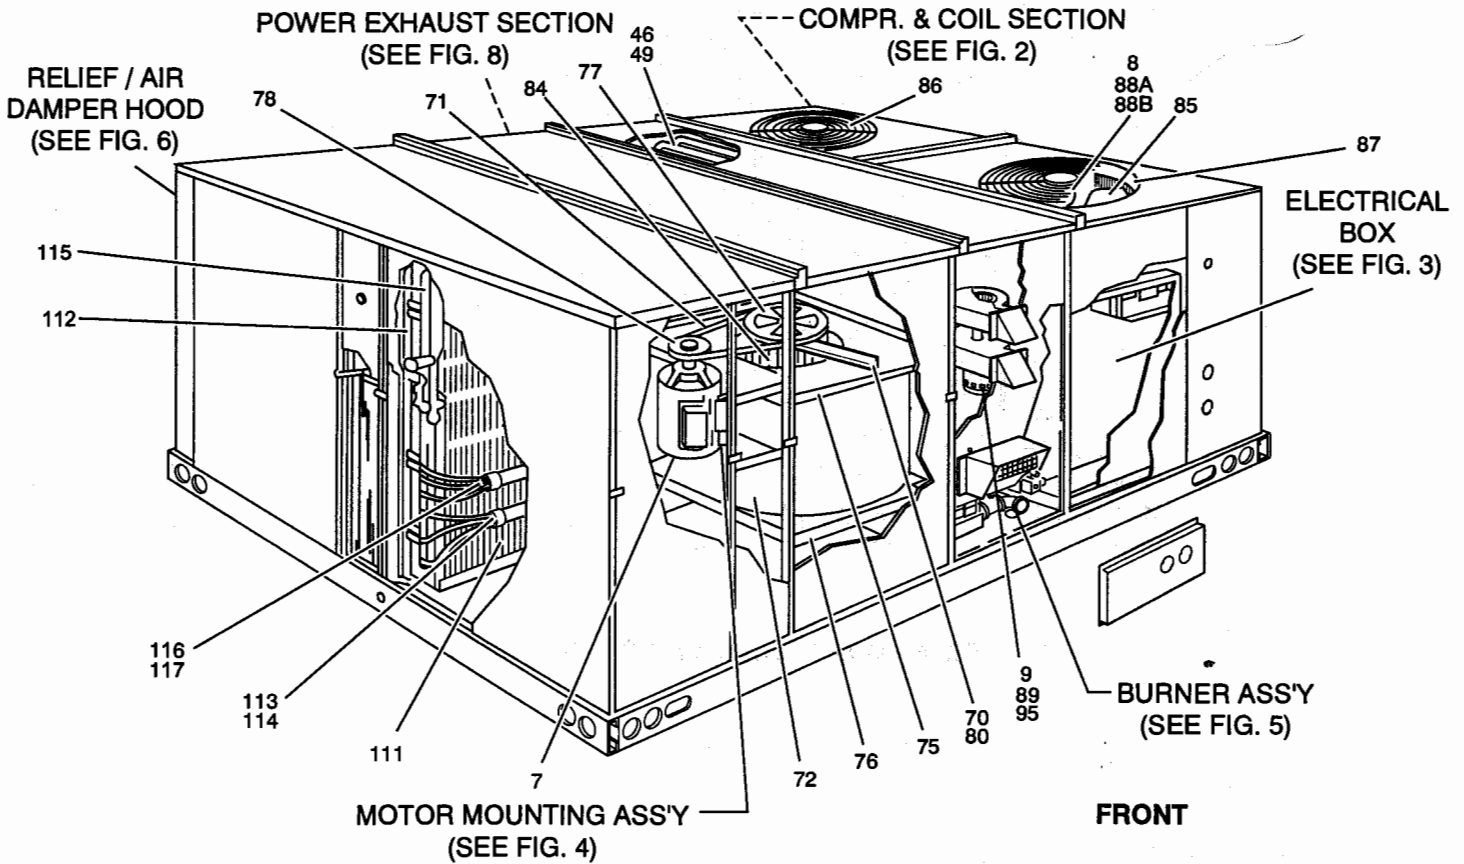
SINGLE PACKAGE GAS / ELECTRIC UNIT
